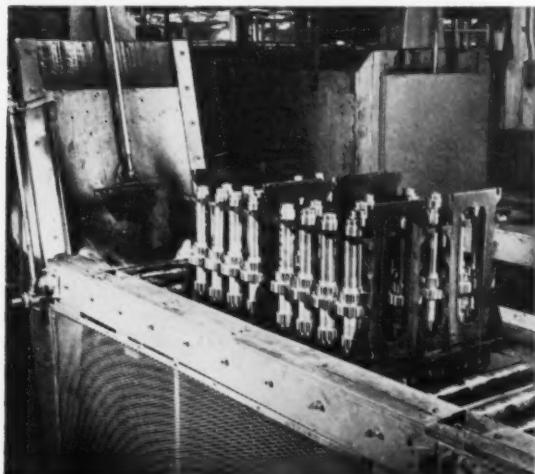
Cast tray and fixture adapted to counter shafts, ready for charging into carburizing furnace. Discharge end of tempering furnace adjacent to right.
